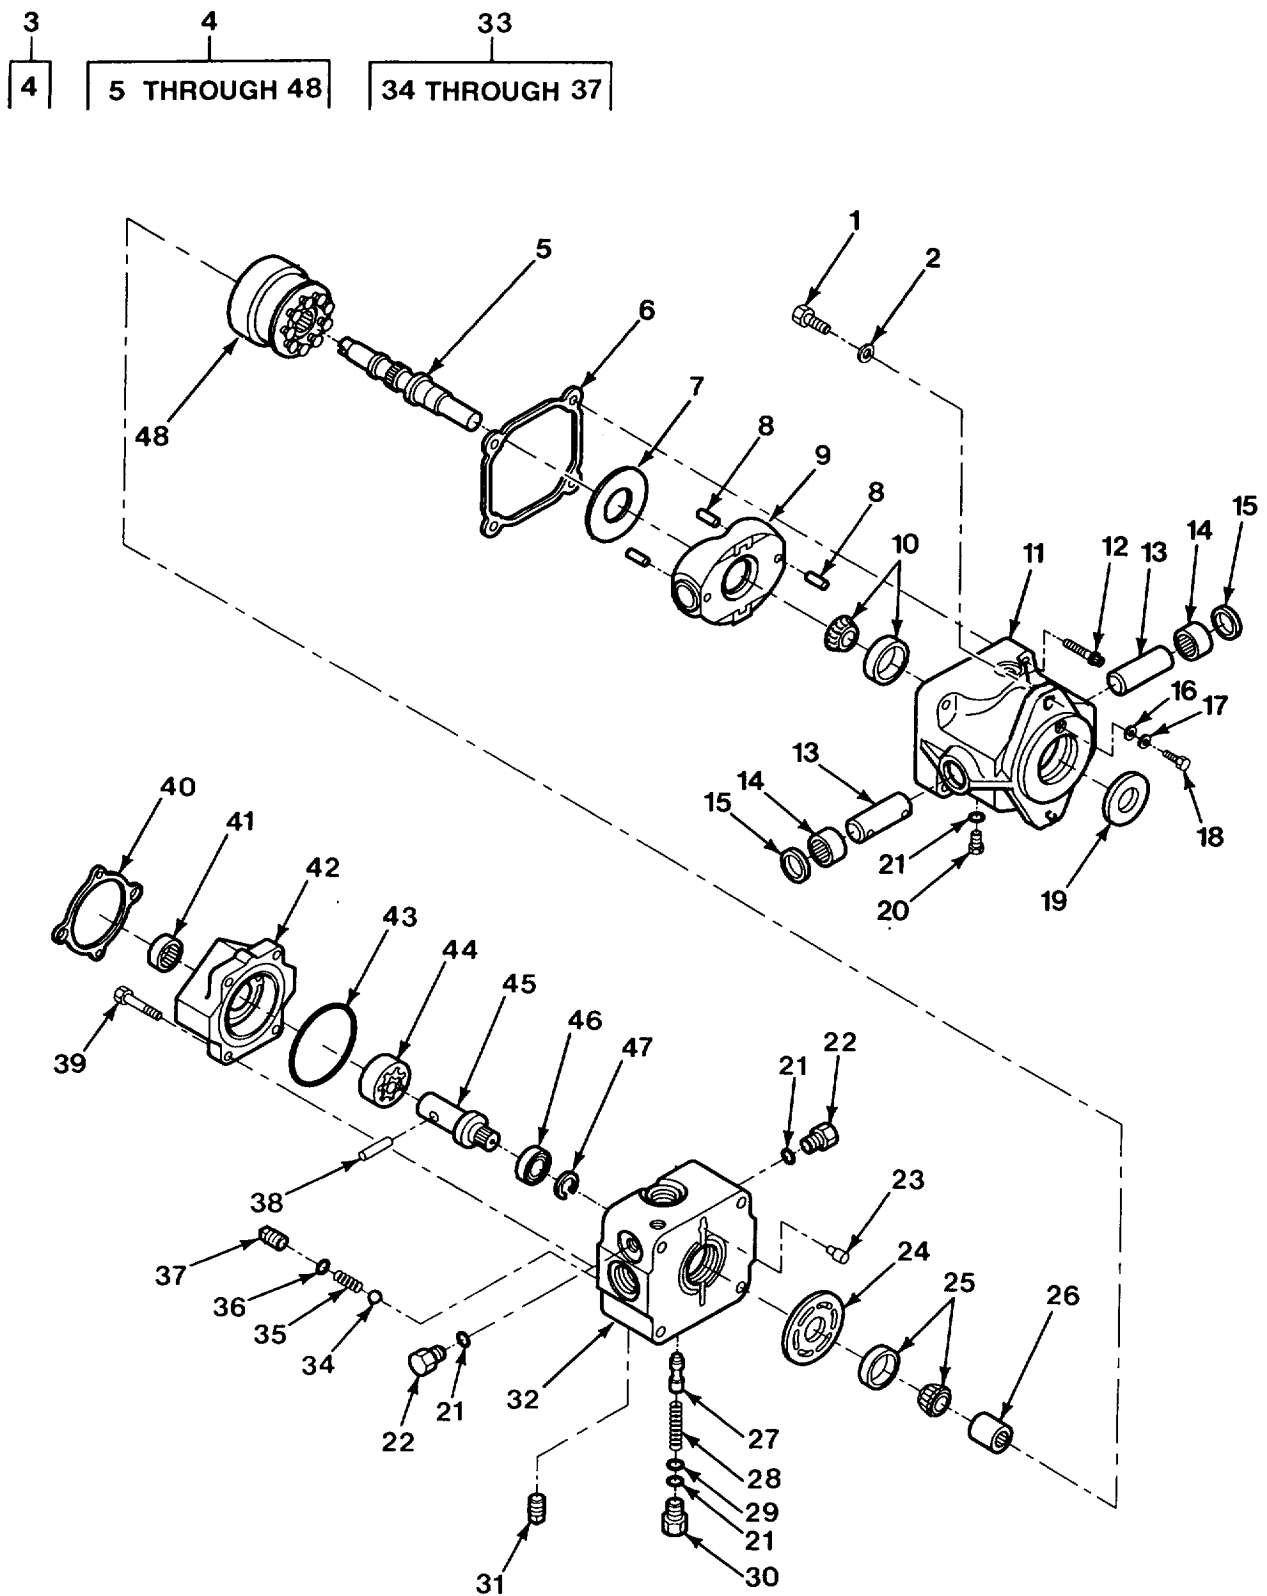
TRANSMISSION PUMP ASSEMBLY
